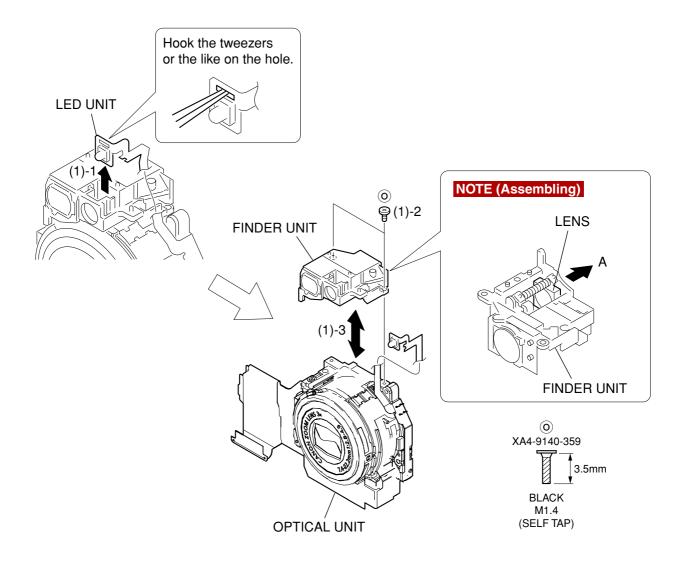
OPTICAL UNIT, FINDER UNIT - (2)
